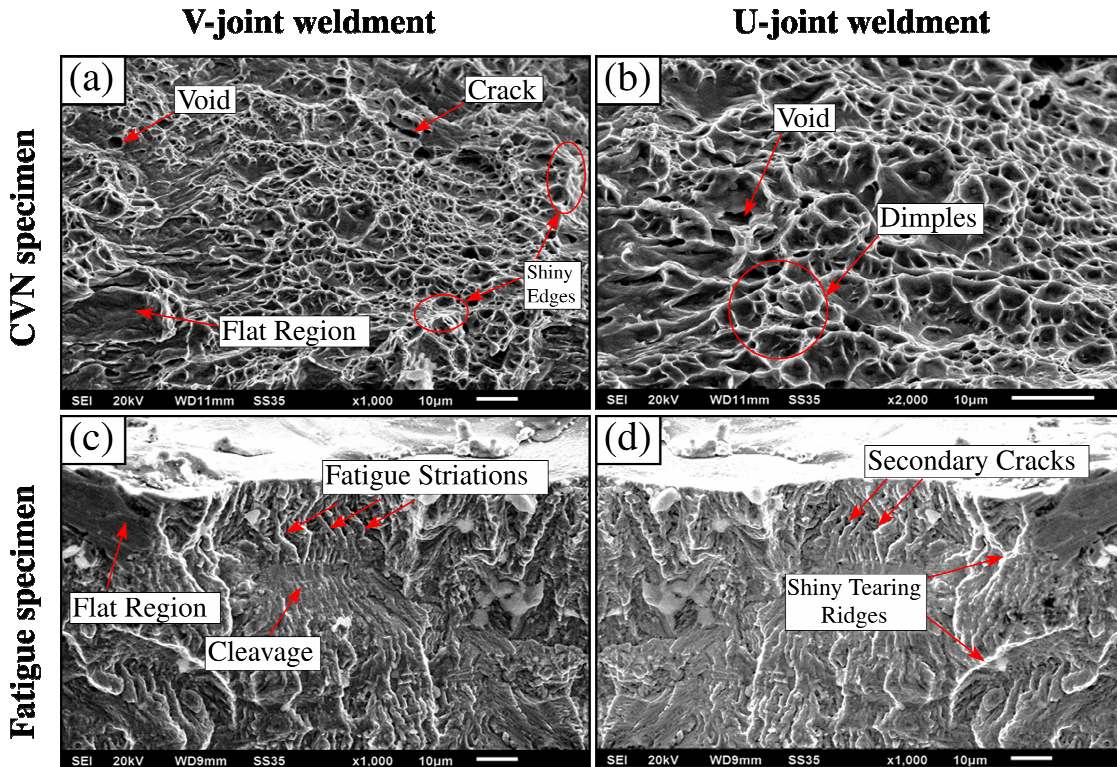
SEM images of the fractured surface for V-joint and U-joint specimens, fractured by CVN and fatigue testing, show various features like voids, dimples, shiny ridges on the fracture surface, and fatigue striation marks, cleavage, and tearing ridges.
